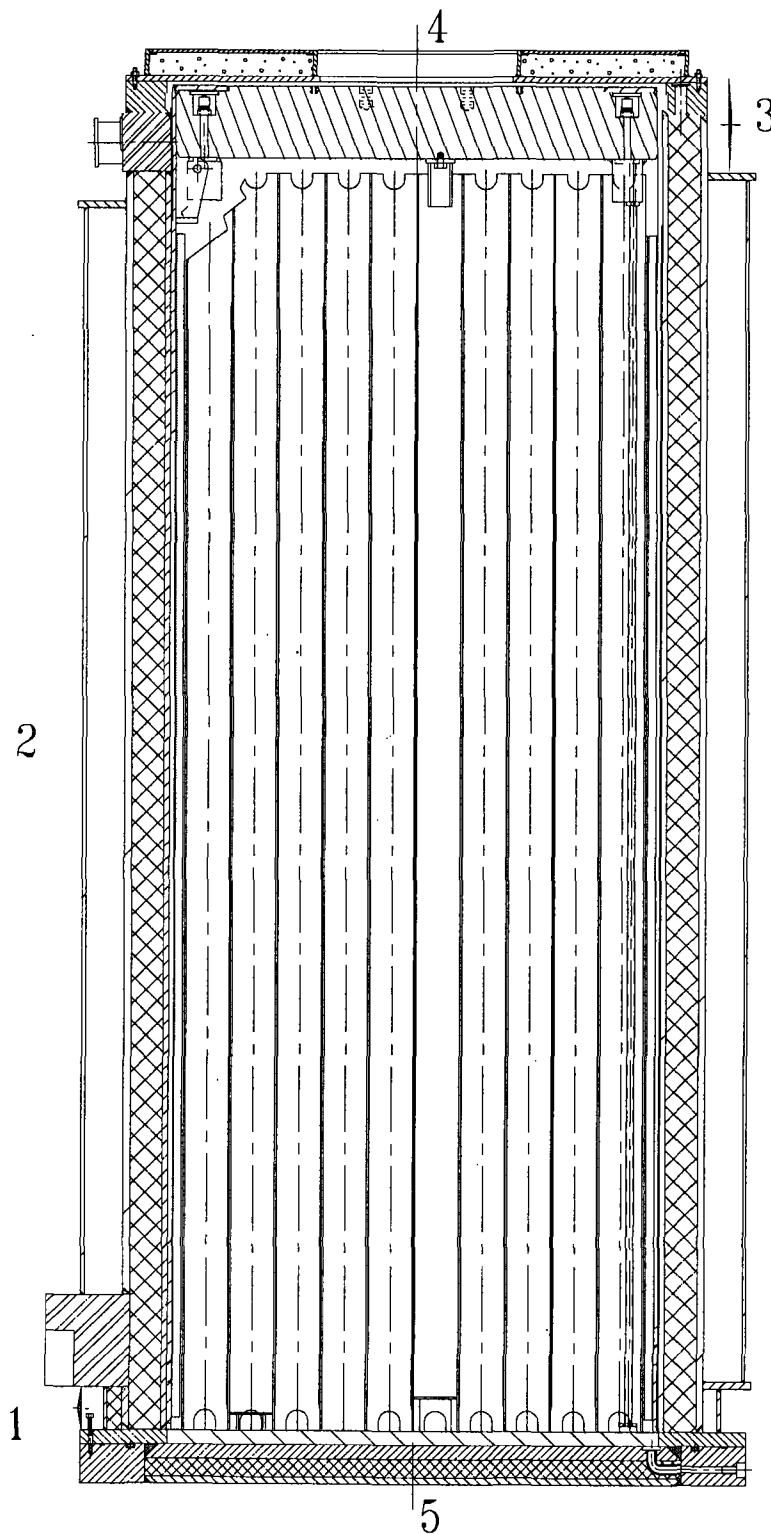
; CROSS SECTION ELEVATION VIEW OF 125 TON HI-TRAC TRANSFER CASK WITH DOSE POINT LOCATIONS
